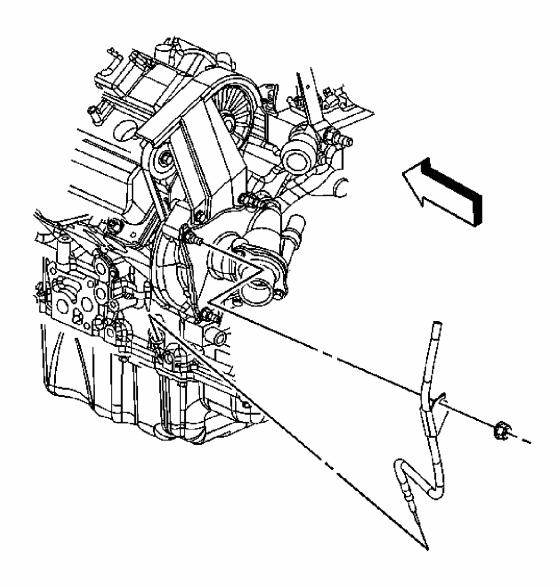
Identifying Oil Level Indicator Tube Courtesy of GENERAL MOTORS CORP.
